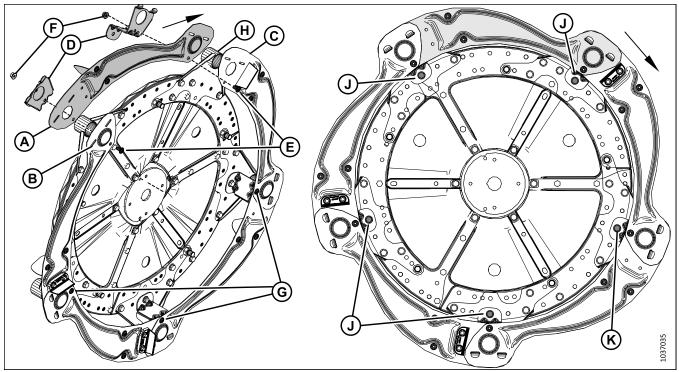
Five-Bat Reel – Partially Assembled Reel Endshields on Reel
